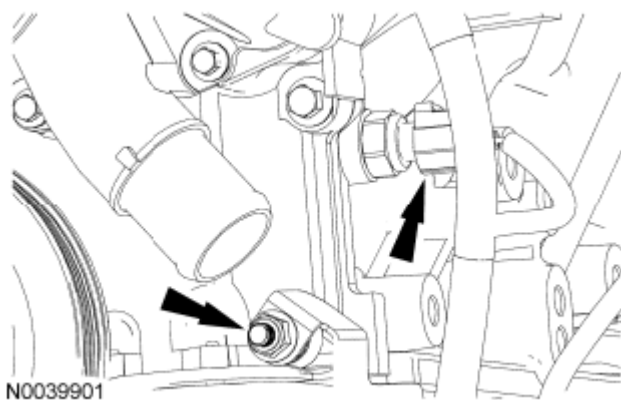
Locating EOP Switch Electrical Connector And Nut
